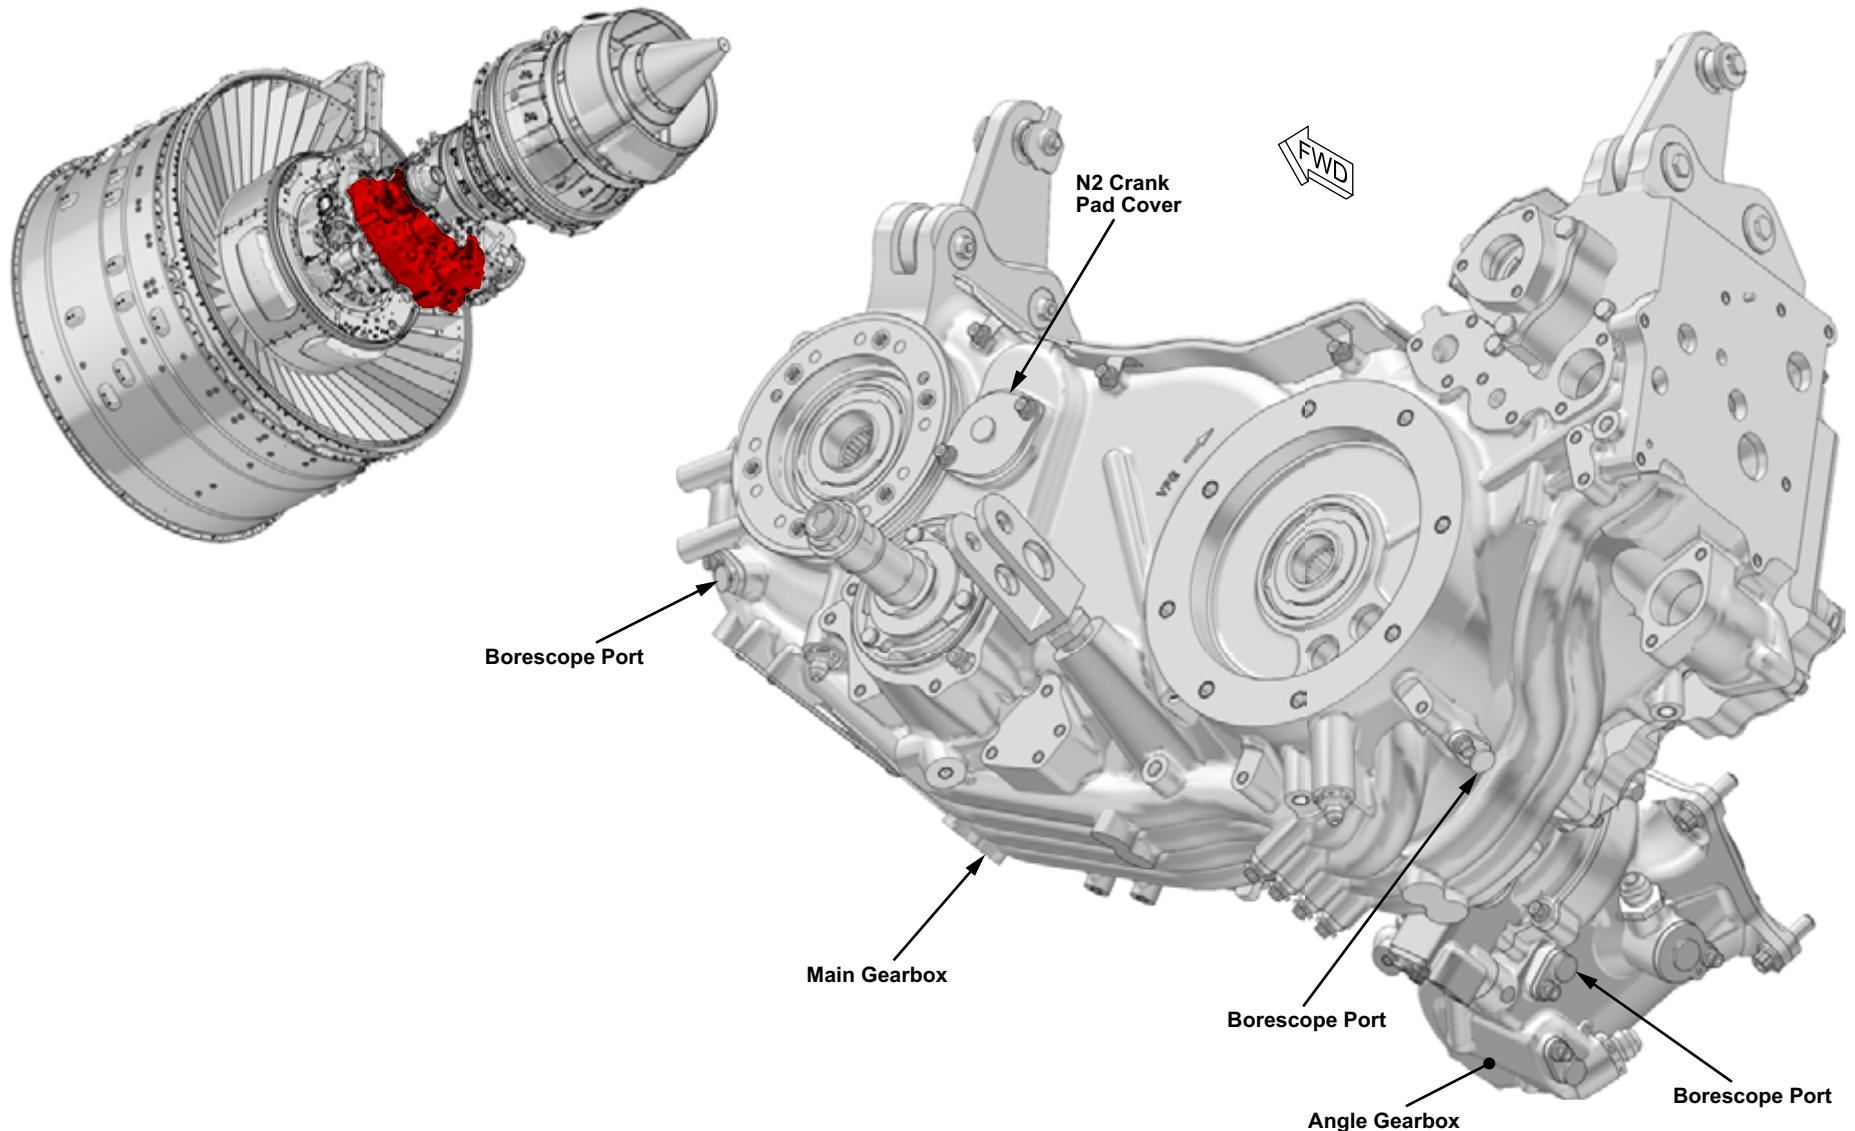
Borescope Access - Gearbox and Angle Gearbox
